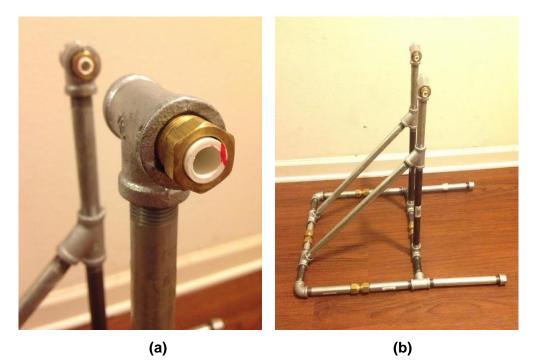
(a) Stand Connection Mechanism. (b) Completed Rear Stand.
